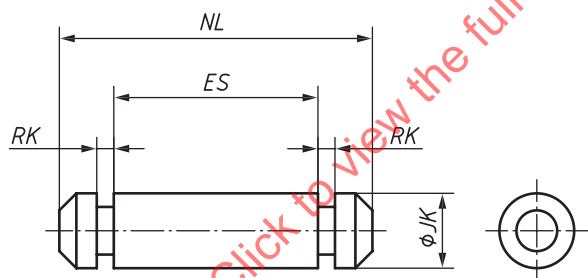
AA6 - R — Pivot pin, spherical bearing, rings
